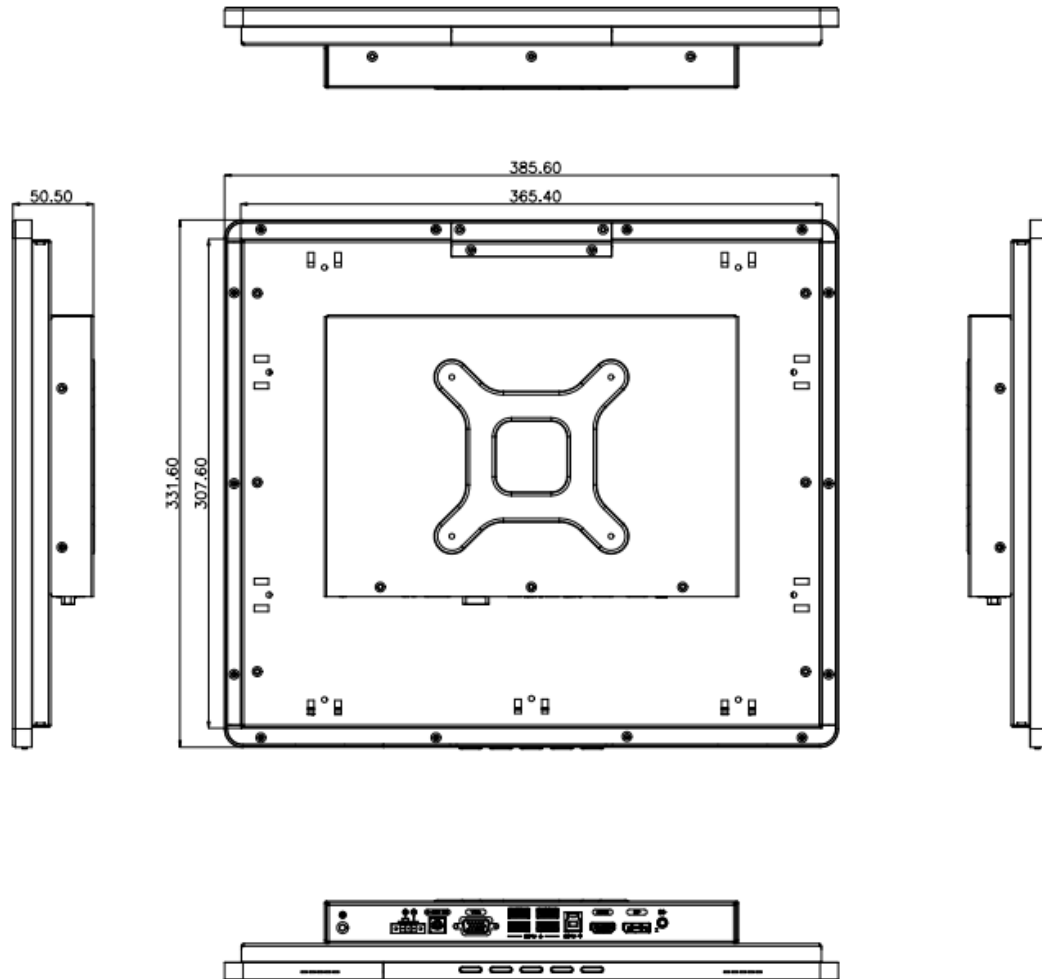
DM2-170H(L) Physical Dimensions (Unit: mm)
